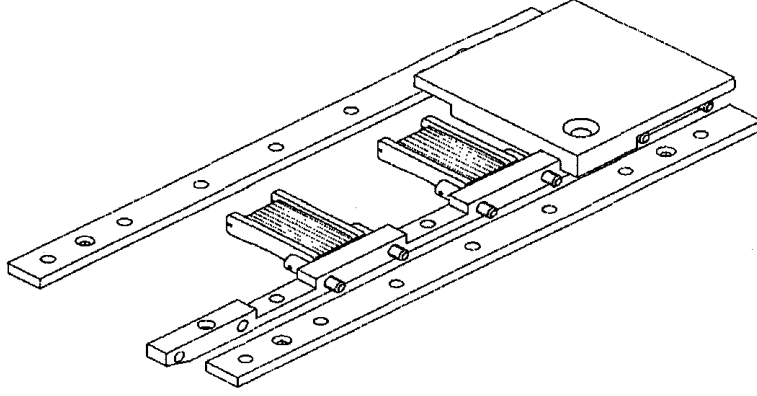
Drawing of the magnetic probe assembly on the vacuum vessel.⁽³¹⁾
